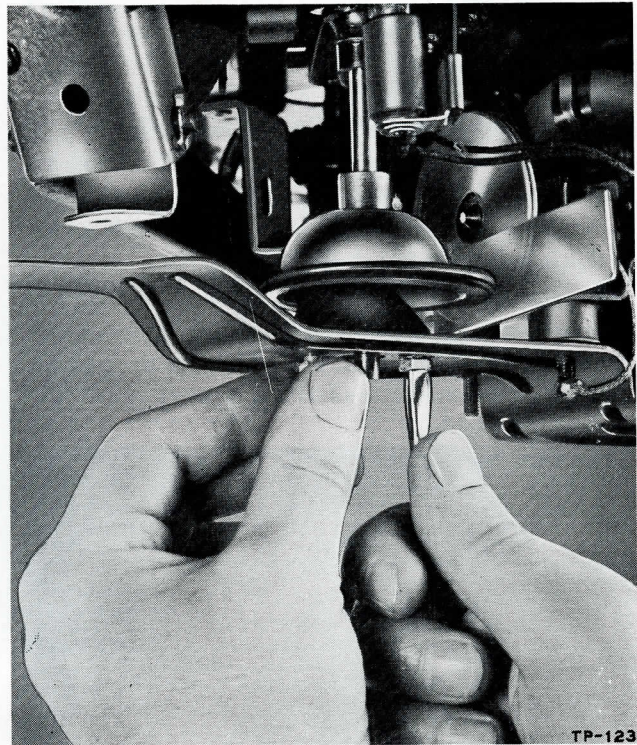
ADJUSTING CLEARANCE OF BELL DRIVE
